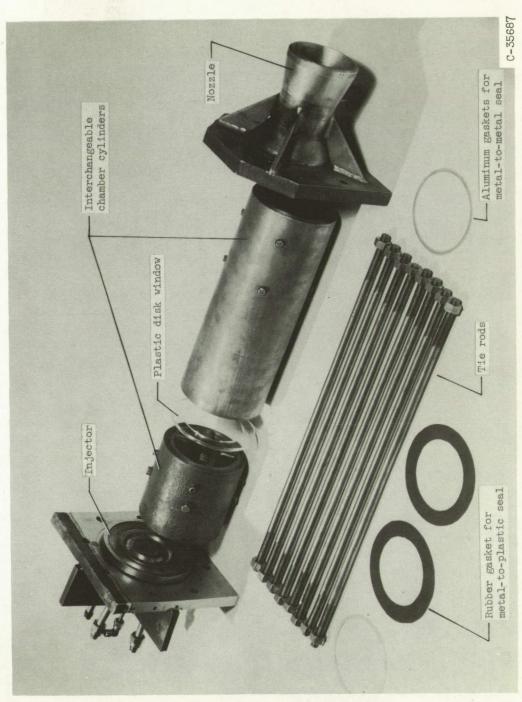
Disconnected engine assembly used for lateral-streak photography.
